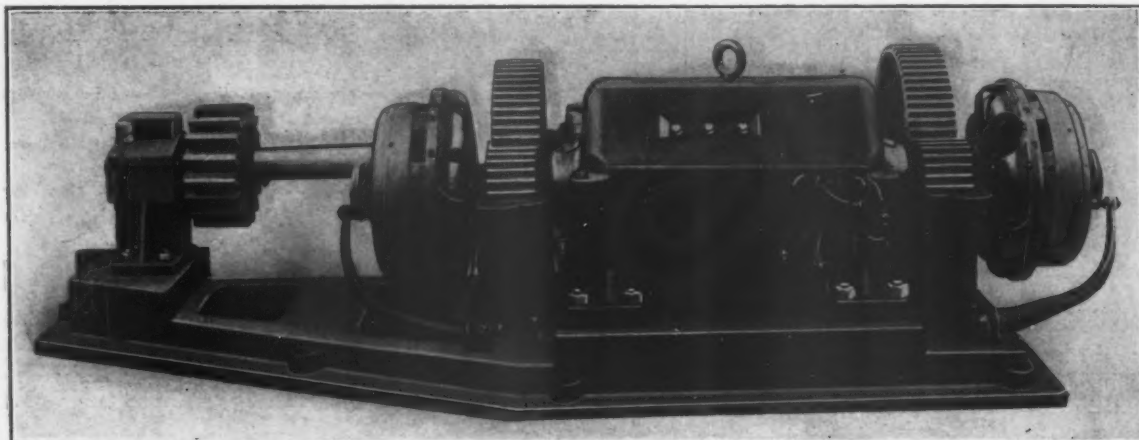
A View from the Opposite Side of a 75-Hp. Rolling Mill Reversing Drive.
